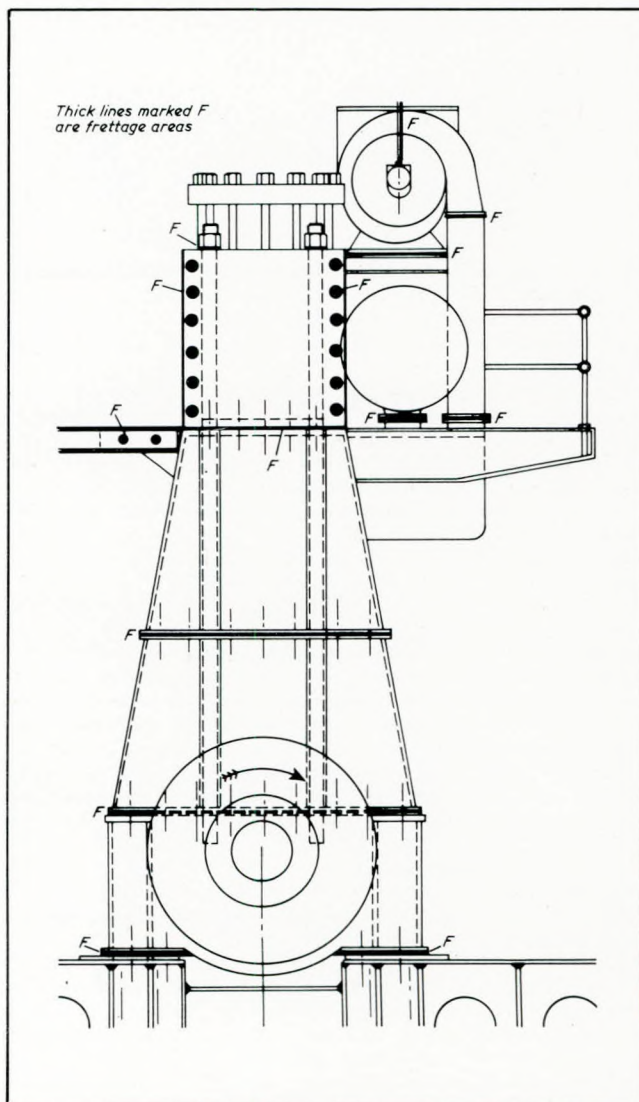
Fretting damage in large diesel engines is marked in thick black lines
